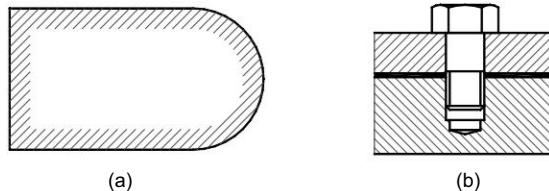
Section (a) in very large drawing (b) very thin material drawing such as gasket
